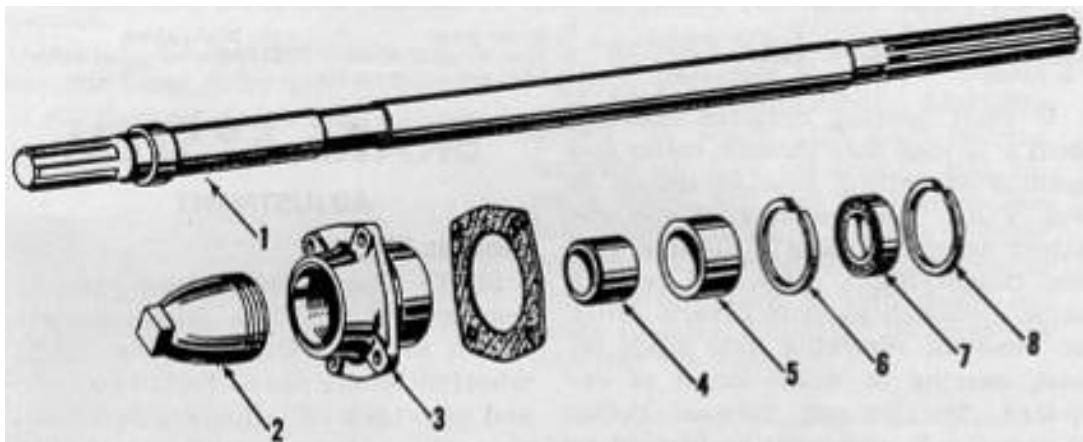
Power take-off shaft assembly as used on 8N and late production 2N models.
